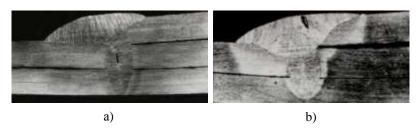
Flaws in multi-layer shell weld seam detected by EMA equipment: a) lack of fusion, b) pore
